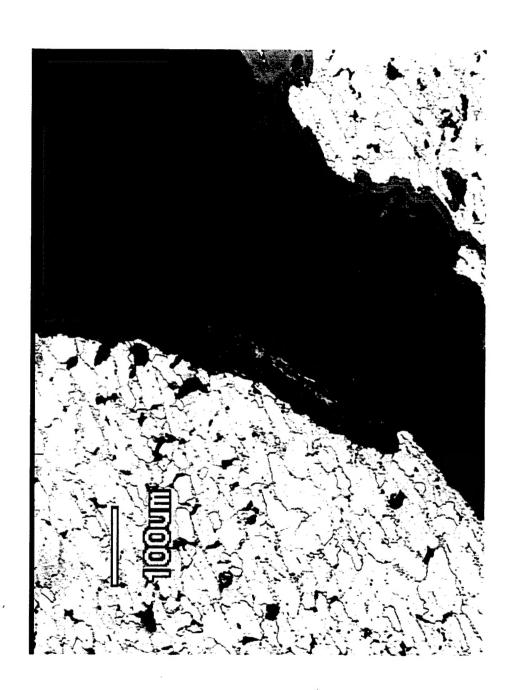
Fracture surfaces near tube midwall. The fracture surfaces are covered with a heavy oxide scale. Copper metal has been transported to this site. Creep voids found in the tube matrix along the fracture. Magnification - 210X.
